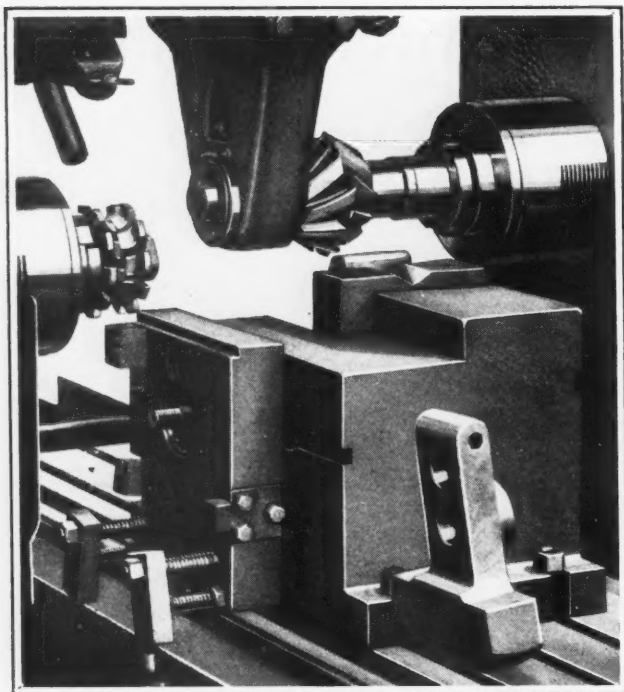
Fixture for Simultaneously Milling Round End and V-Notch in Rear Crank Cheeks
